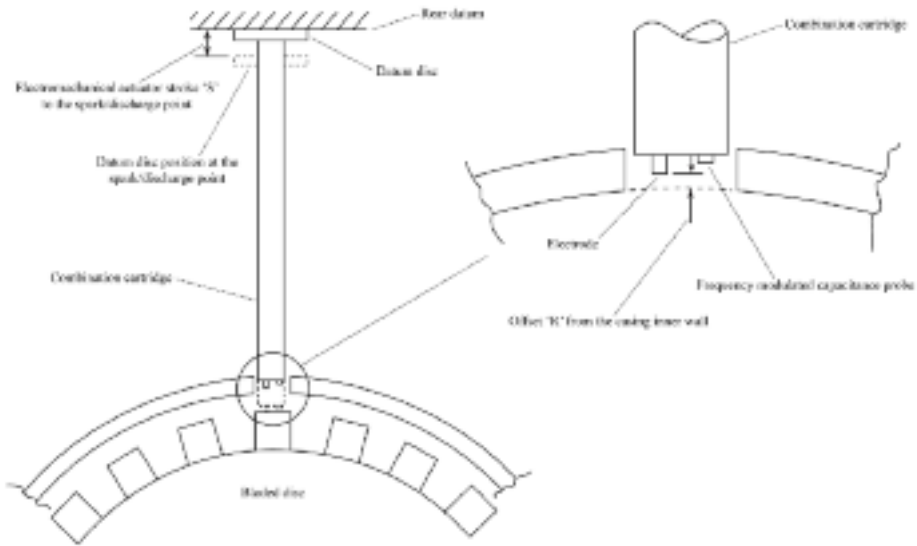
A schematic view of the probe installation illustrating the factors used to calculate blade tip-to-casing clearance over the longest blade.
